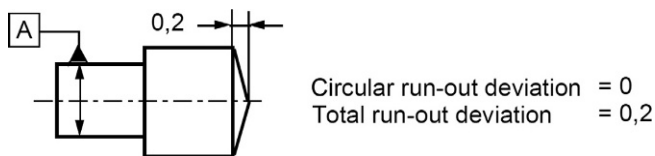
Workpiece with total axial run-out deviation, but without circular axial run-out deviation
